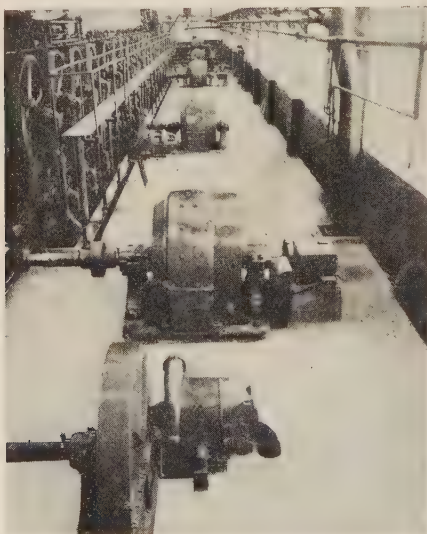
REGULATOR TYPE OF SECTIONAL DRIVE
